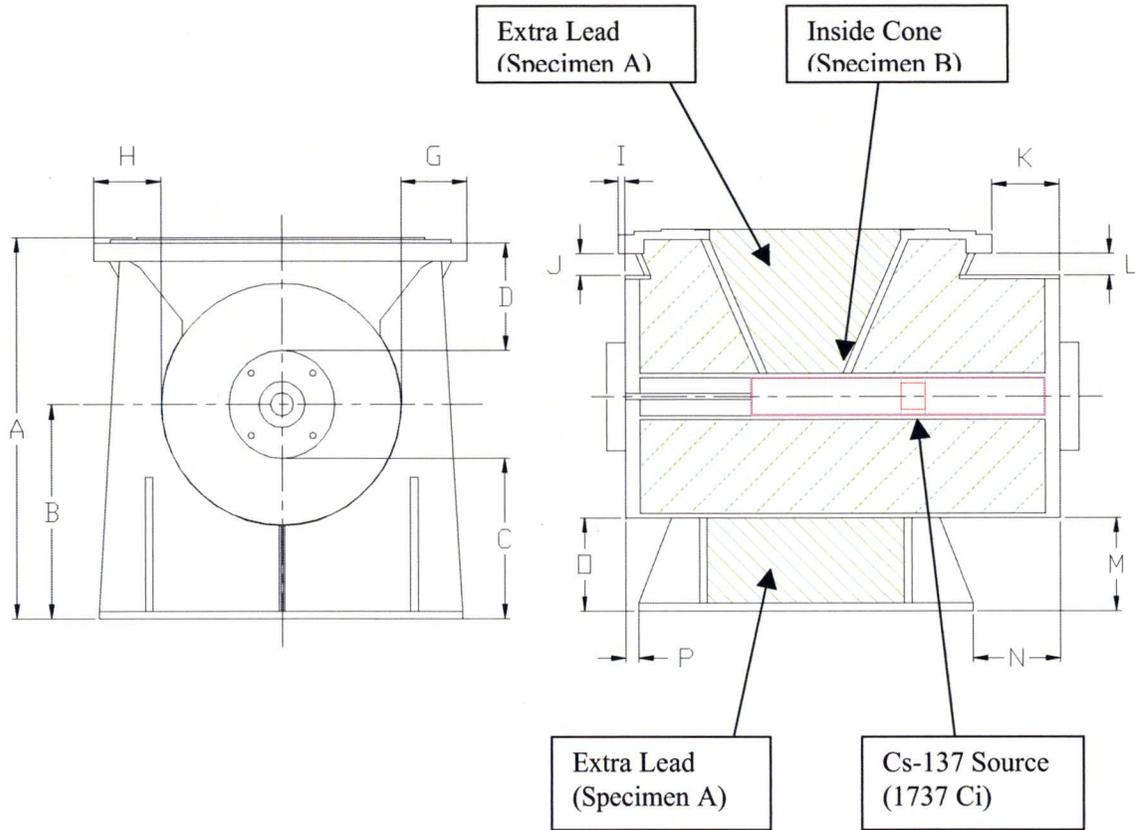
, GC-40 Lower Head, Pre-Drop Dimensions
